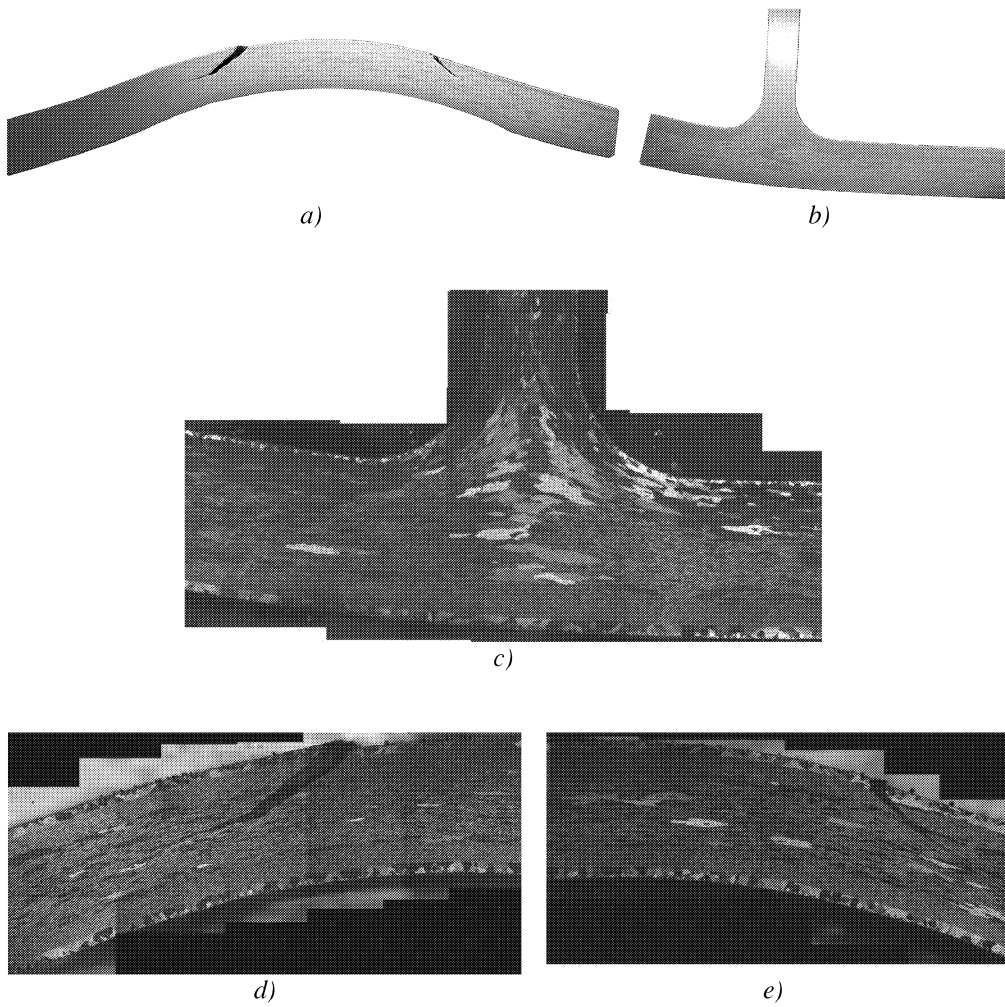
Section S1-S1 across the stiffener in test specimen C2-2.
